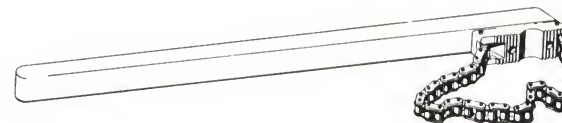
Chain Wrench for Attaching Warhead to Motor.
